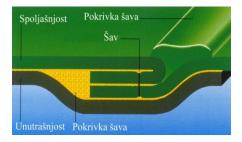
Seam construction in Vautex Puc. 4 – Конструкция шва на Vautex Слика 4 – Конструкција шава код Vautex-a
